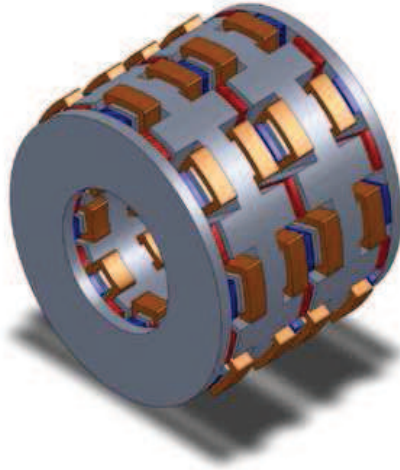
Multistage axial flux machine with two stators and three rotors
